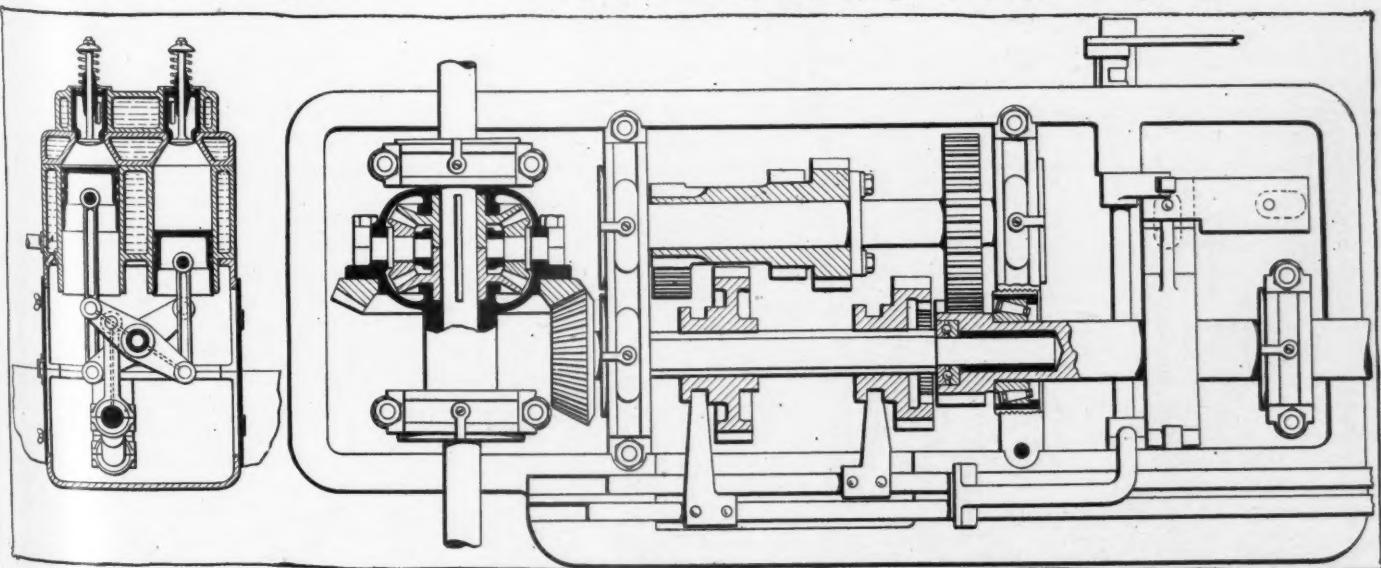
BRITISH WALKING BEAM MOTOR AND HERCULES GEARSET
